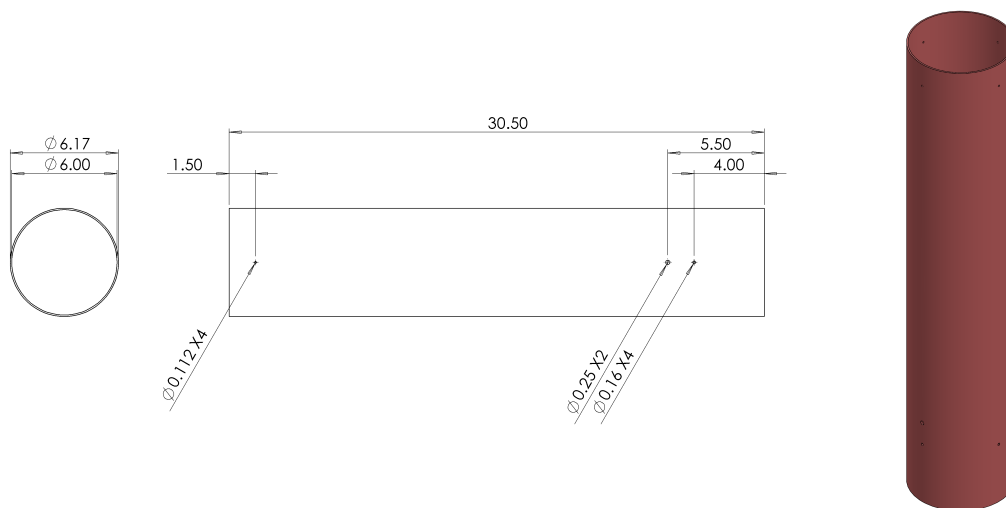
Main Parachute Bay dimensional drawing (in.)
